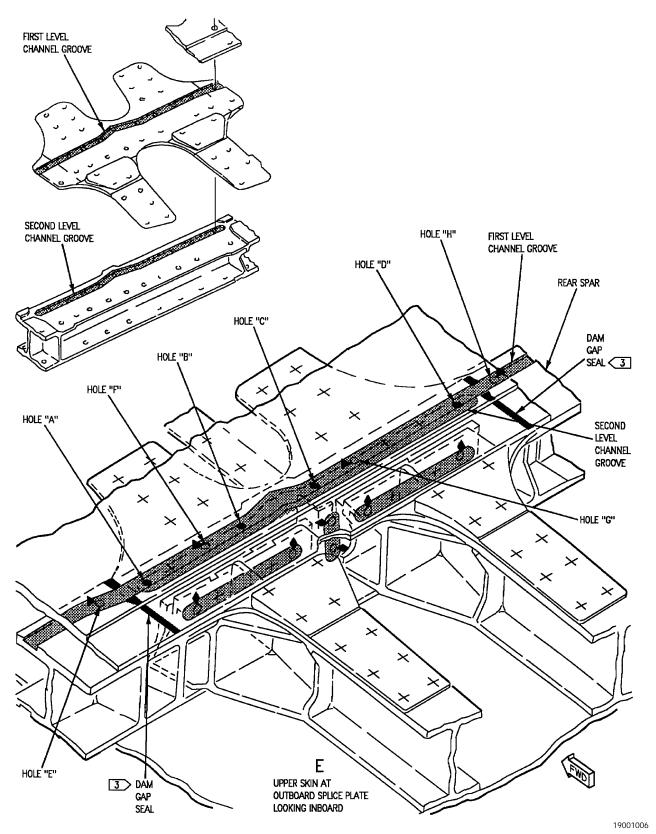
Upper Skin Channel Groove Seal Injection (Sheet 6)
